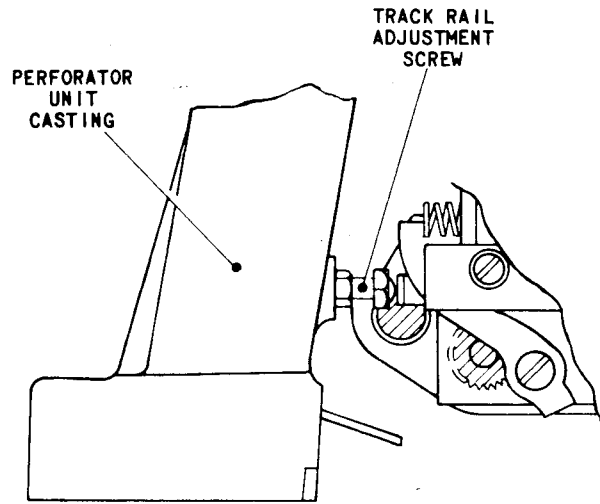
CORRECTOR TRACK RAIL ADJUSTMENT MECHANISM
